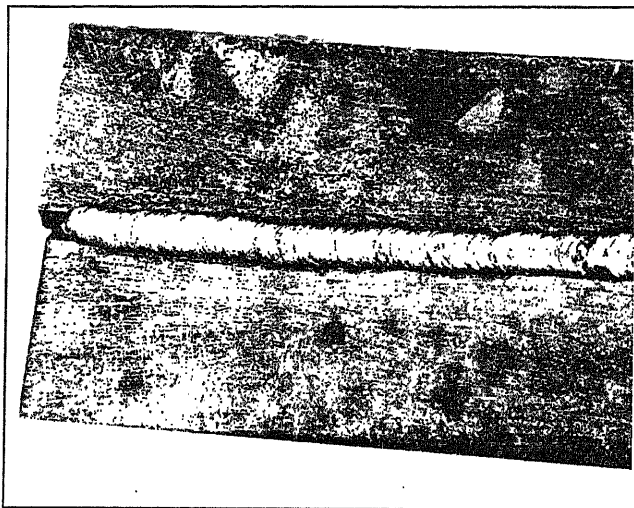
Two  $\frac{1}{2}$ -in. Ship Plates Automatically Welded by Metallic-Electrode Process to Form Butt Joint.
